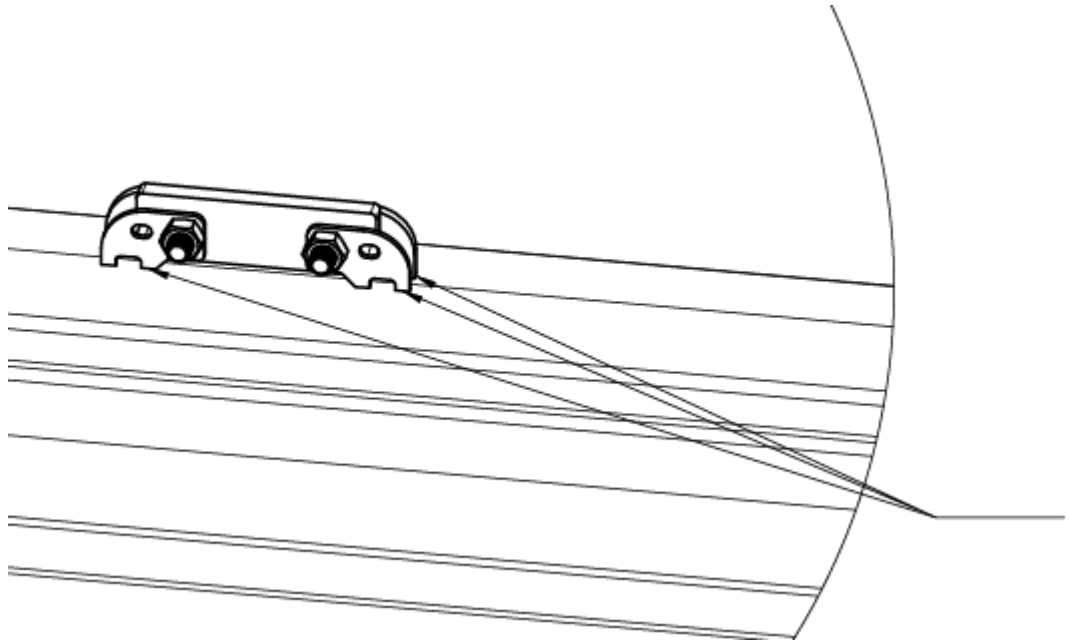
Welding the brackets oriented by jig.
